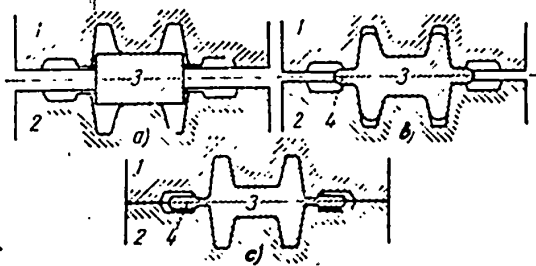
Formation of a Burr: a - Beginning of stamping; b - Intermediate phase; burr begins to form; c - End of stamping; 1 - Upper die; 2 - Lower die; 3 - Stock; 4 - Burr
